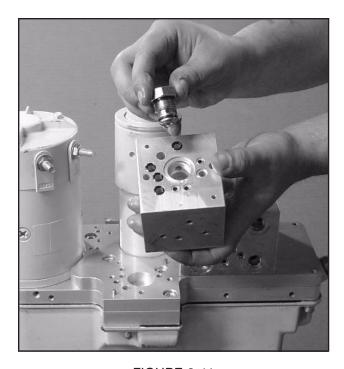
Use a 15/16" wrench or deep well socket to remove the bottom P.O. Check valve assembly from the Universal Valve Block Assembly.
